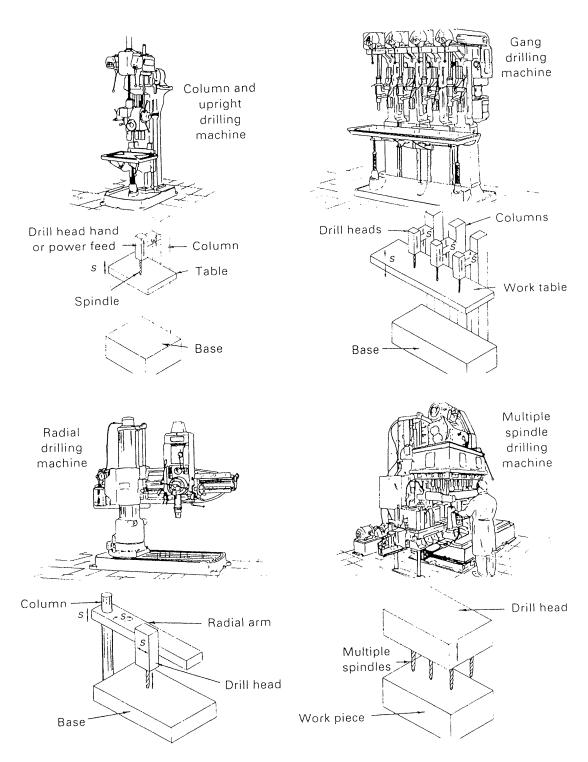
Four principal types of drilling machines. (From Manufacturing Producibility Handbook, courtesy of General Electric Company.)
